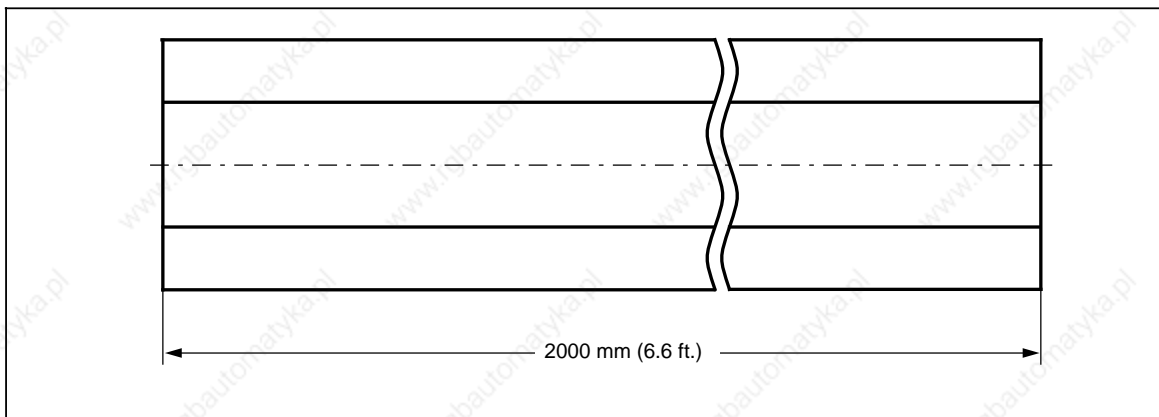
Dimension Drawing of the 2-m (6.6-ft.) Standard Mounting Rail
